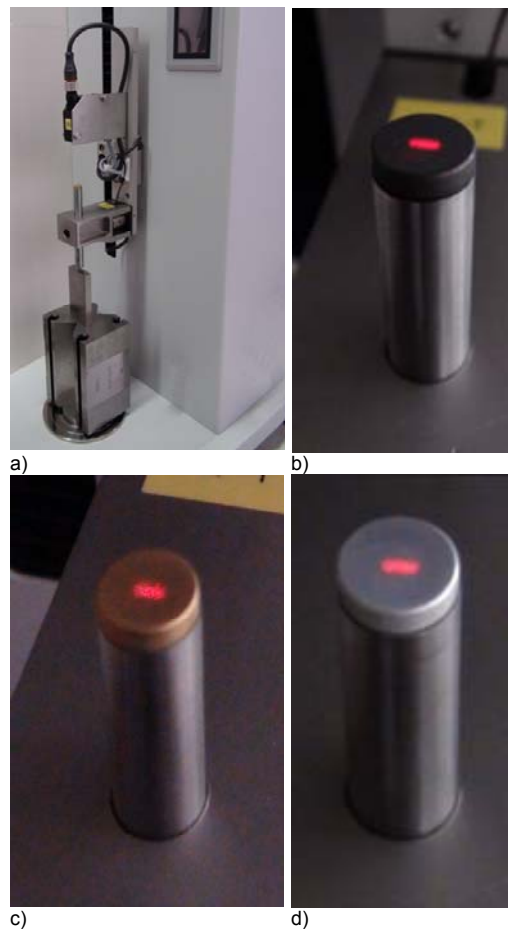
Test stand: a) configuration of the plunger, laser head and gauge blocks, b) view of the laser spot on the CrN surface, c) view of the laser spot on TiN surface, d) view of the laser spot on Al surface
